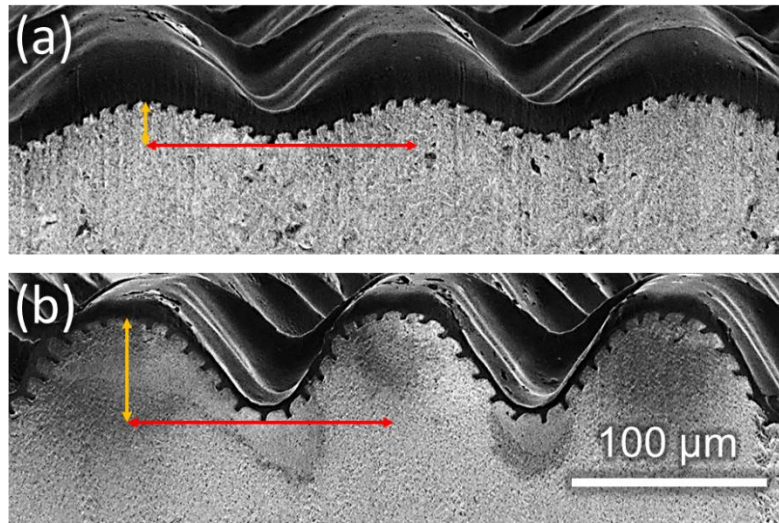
Cross-sectional images of the molded product with (a) a thicker upper layer, and ( b) a thinner upper layer.
